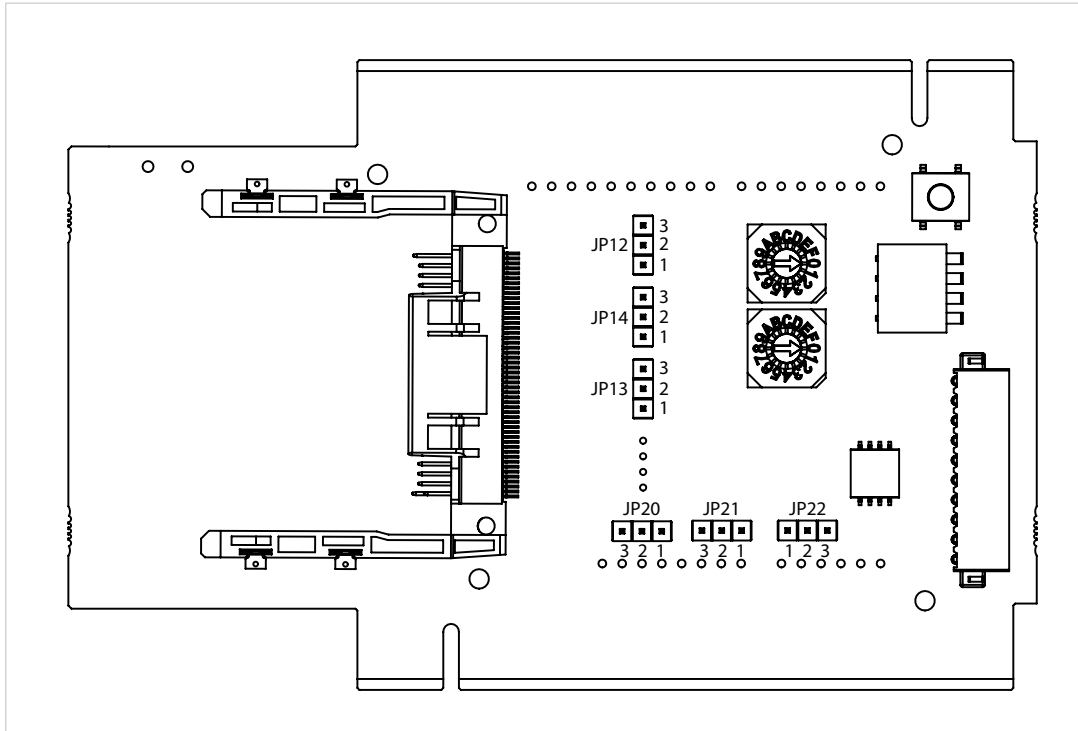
Top view of the adapter board with jumper (JP) headers marked
